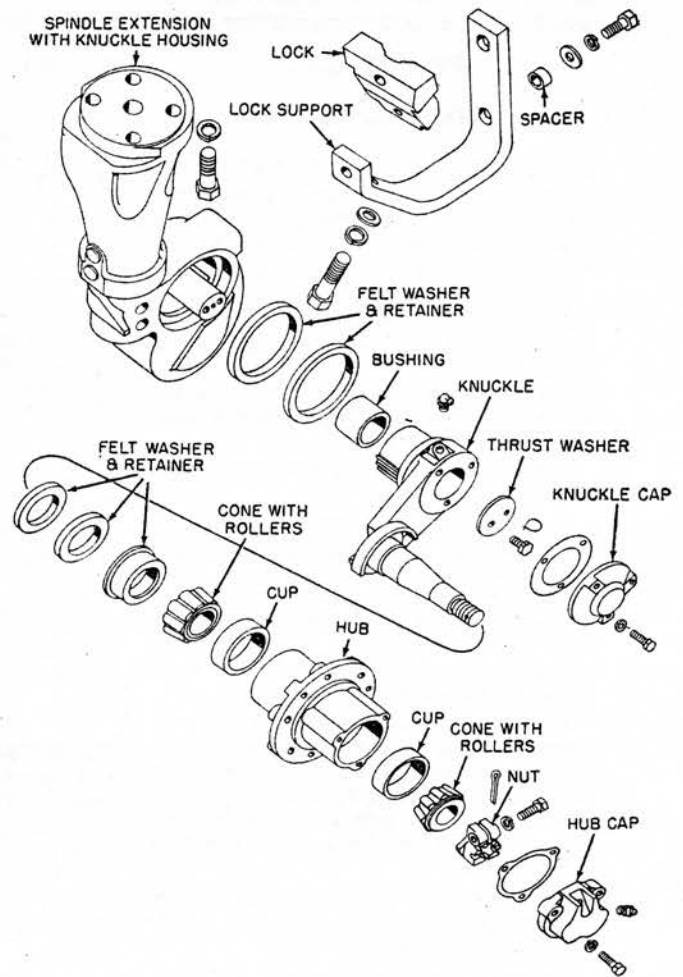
C Exploded view of Model 60 front end Roll-O-Matic assembly as applied to convertible pedestal. Model 50 is similar
